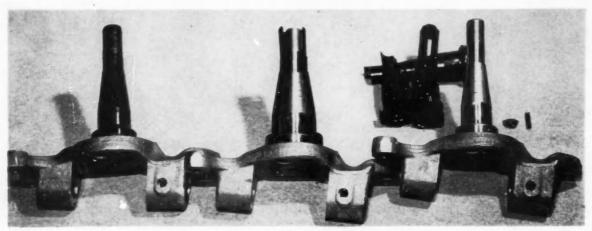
Steering knuckles are coated with plastic strippable film. This coating replaces three chipboard tubes formerly required for mechanical protection
